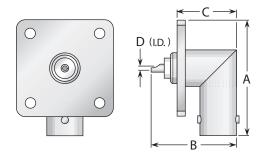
(Solder pot contact, 1" square flange, interchangeable with type N standard flange size)
